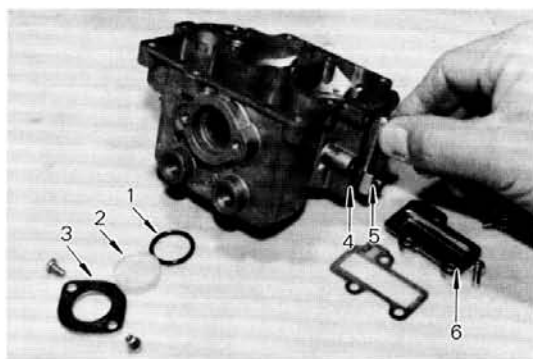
Gauge Glass & Thermostatic Valve Assembly
